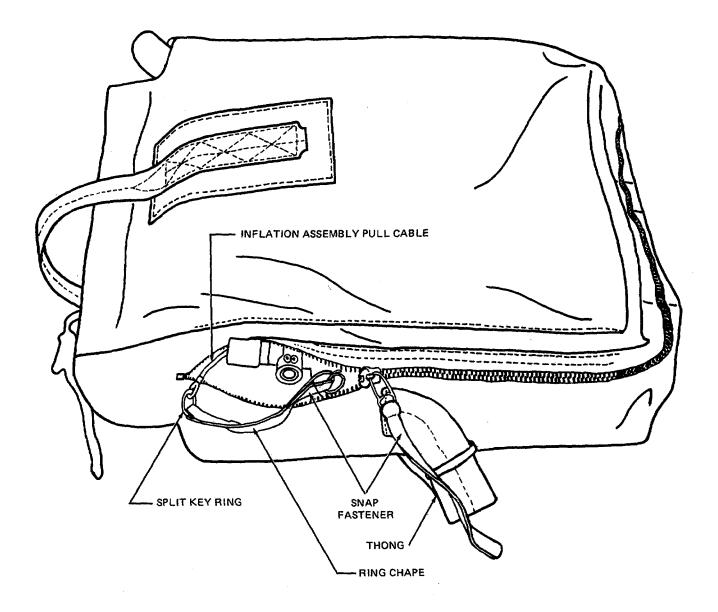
Connecting the raft inflation assembly and kit closing details
